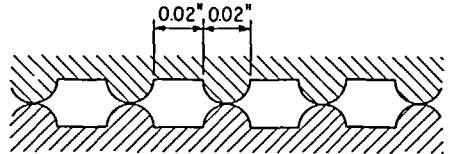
Contact of surfaces made up of cylindrical segments (serrations).
